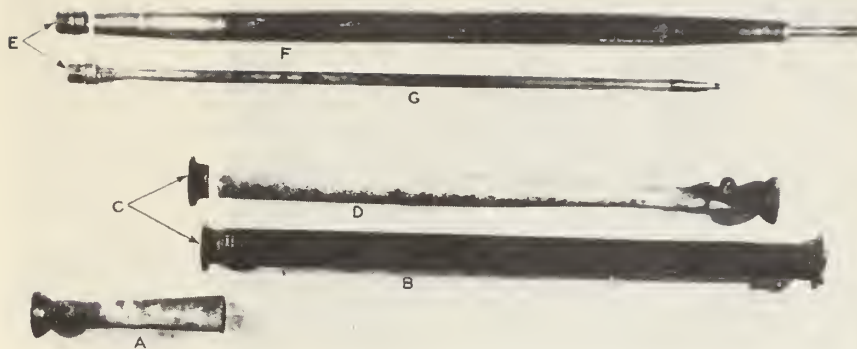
Torque tube and drive-shaft details: A and B, Ford V-8 torque tube; C and D, Ford model A torque tube; E and F, Ford V-8 drive shaft; G, Ford model A drive shaft.
